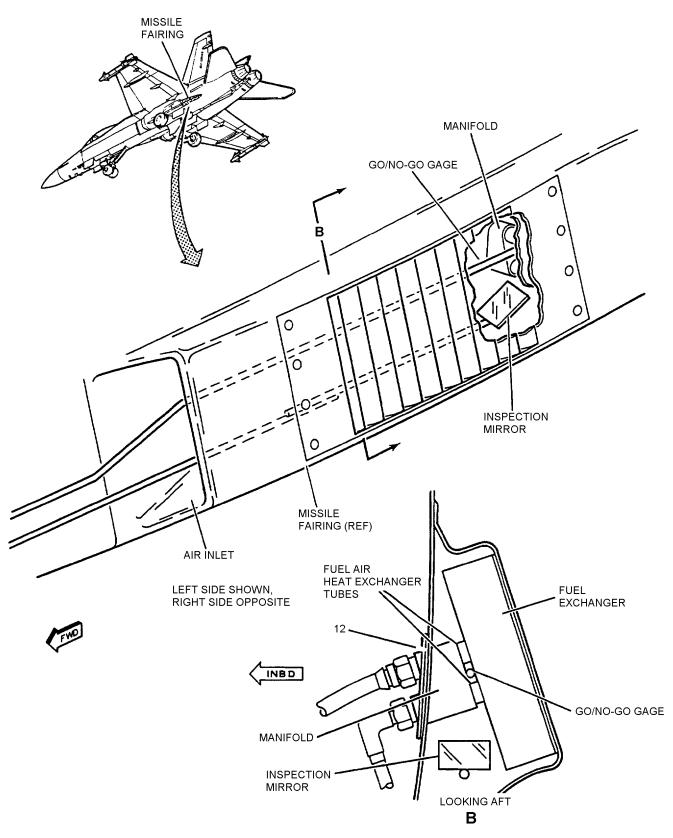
Fuel/Air Heat Exchanger Manifold (Sheet 3)
